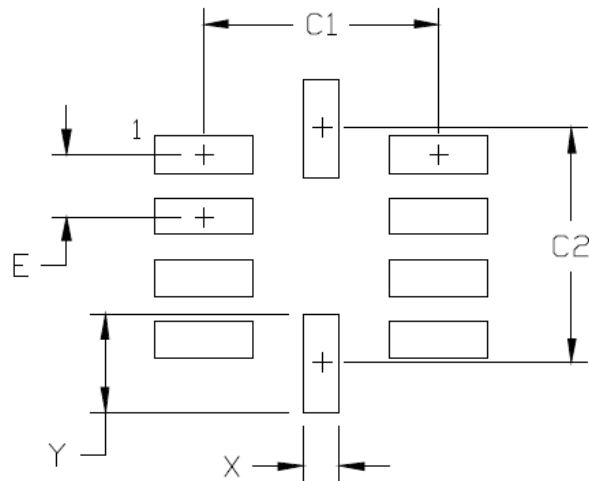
2 x 2 mm DFN PCB Land Pattern
